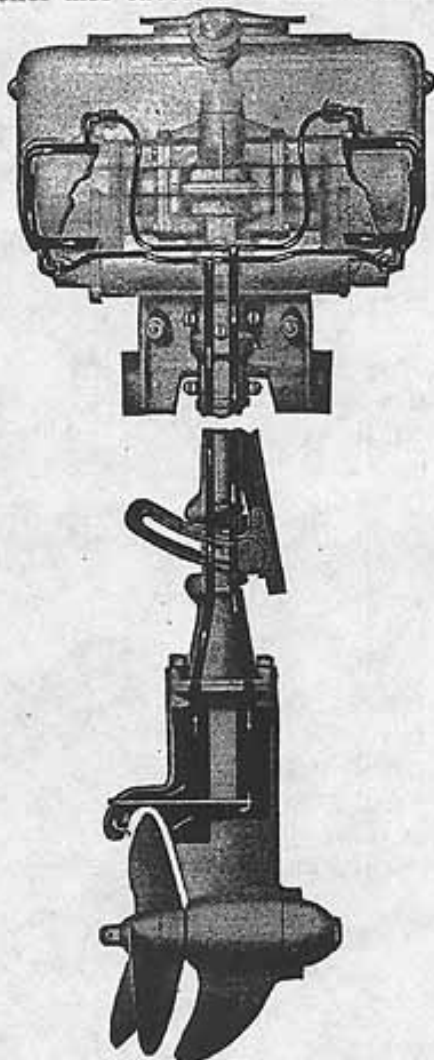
Phantom view of new Pressure-Vacuum Cooling System
